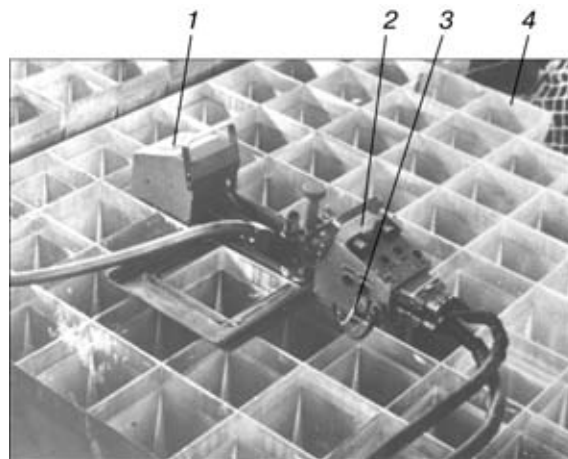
A-1284B automatic machine for making welds around a rectangular perimeter (for designations see the text)
